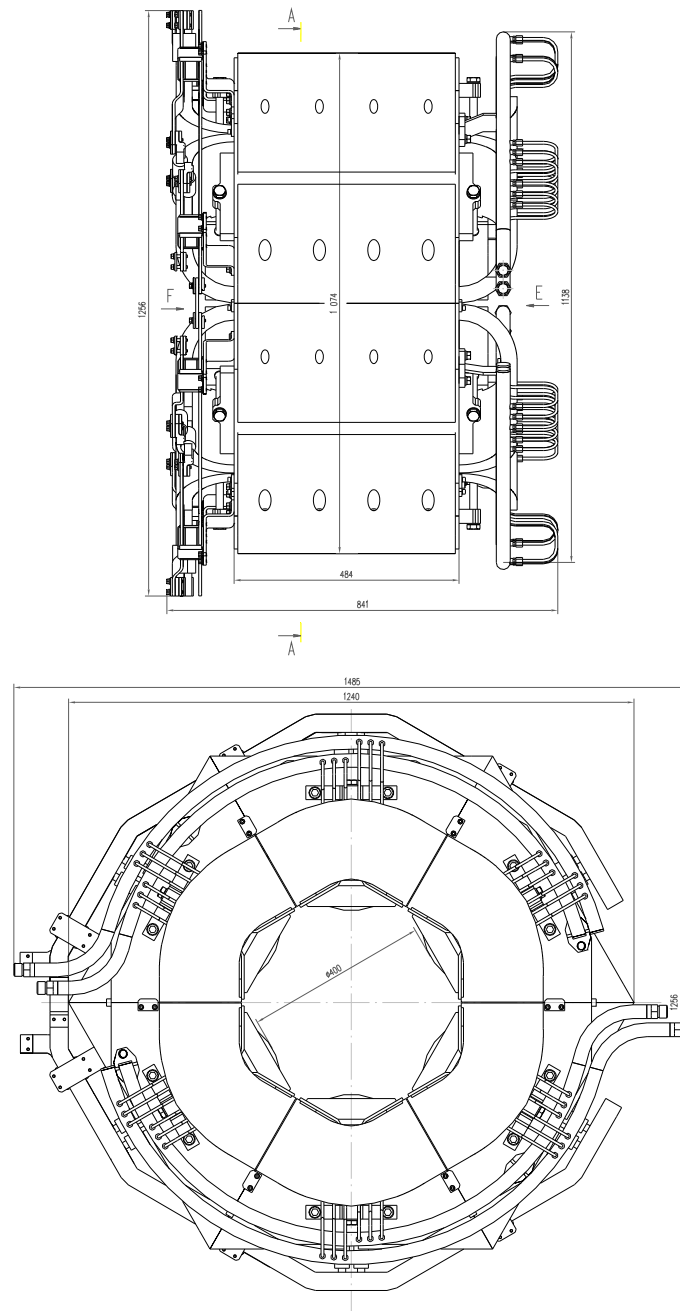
Side view and front view (showing the water connection) of the hexapole magnet.
